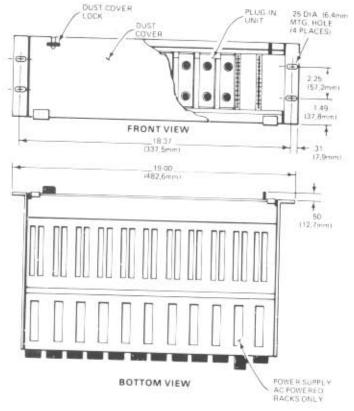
Surface Mounted Card Racks (SMR), Outline and Dimensions
